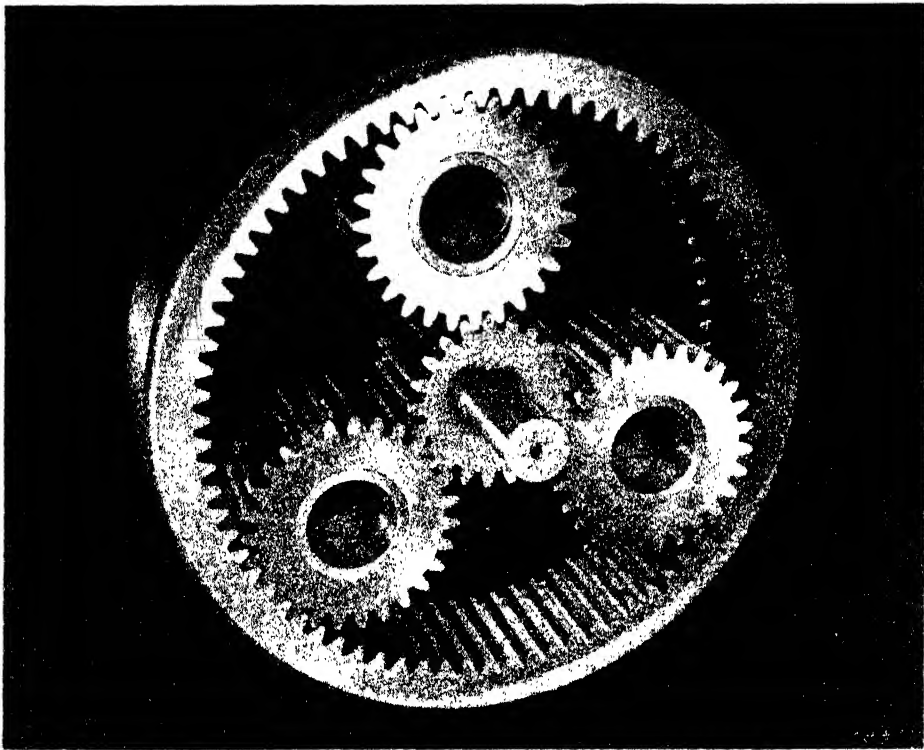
AN INTERNAL GEAR. (Courtesy Gear Grinding Machine Co.)
